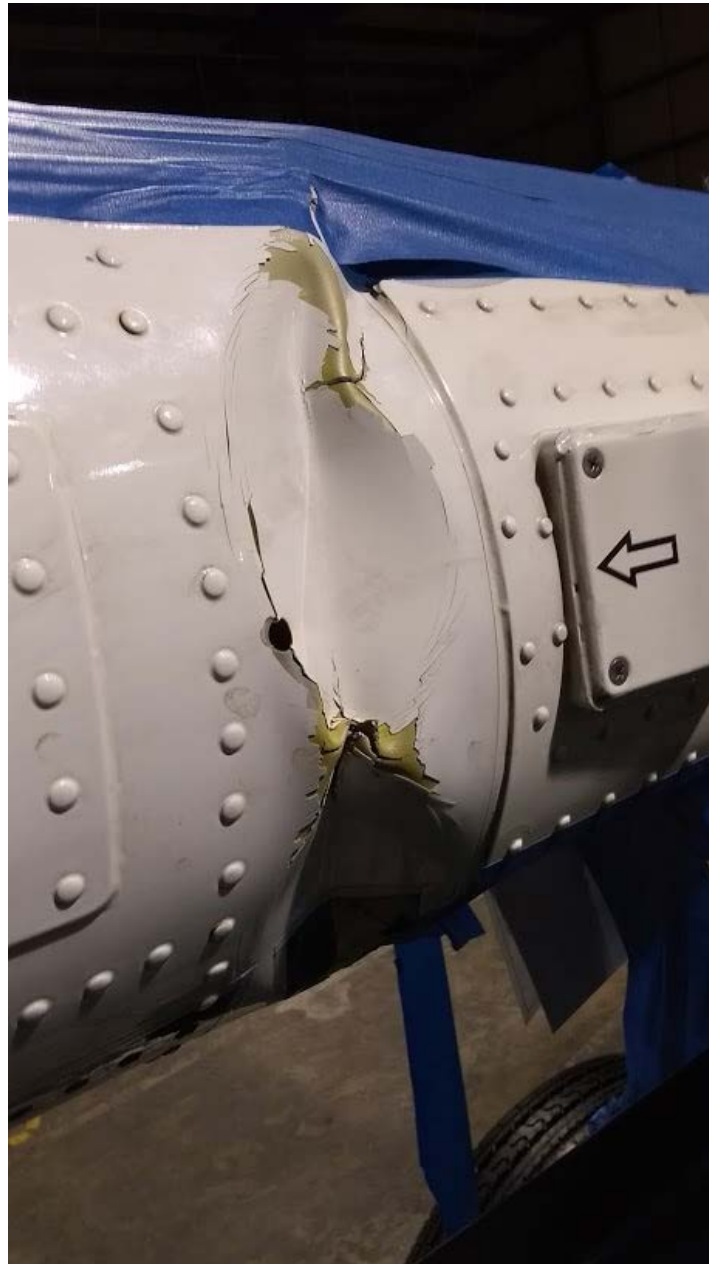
Supplied photo with a view of deformed tail boom skin.
